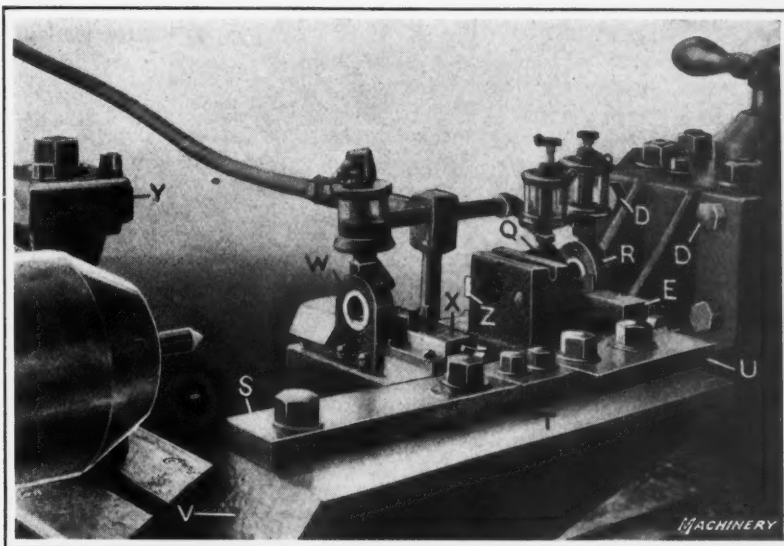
Turret Lathe equipped for turning Tapered Spindles
